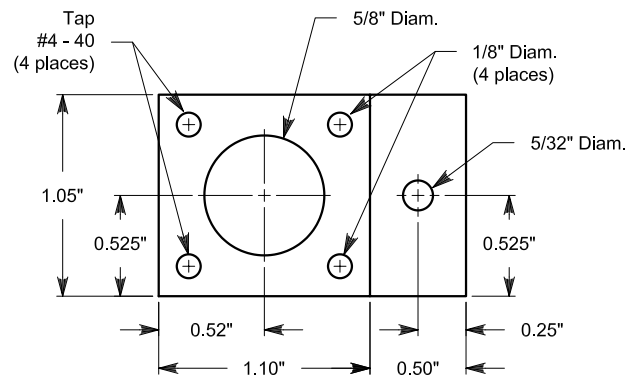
Mounting bracket dimensions (before bending). I recommend 50-mil thick 5052-H32 aluminum.
